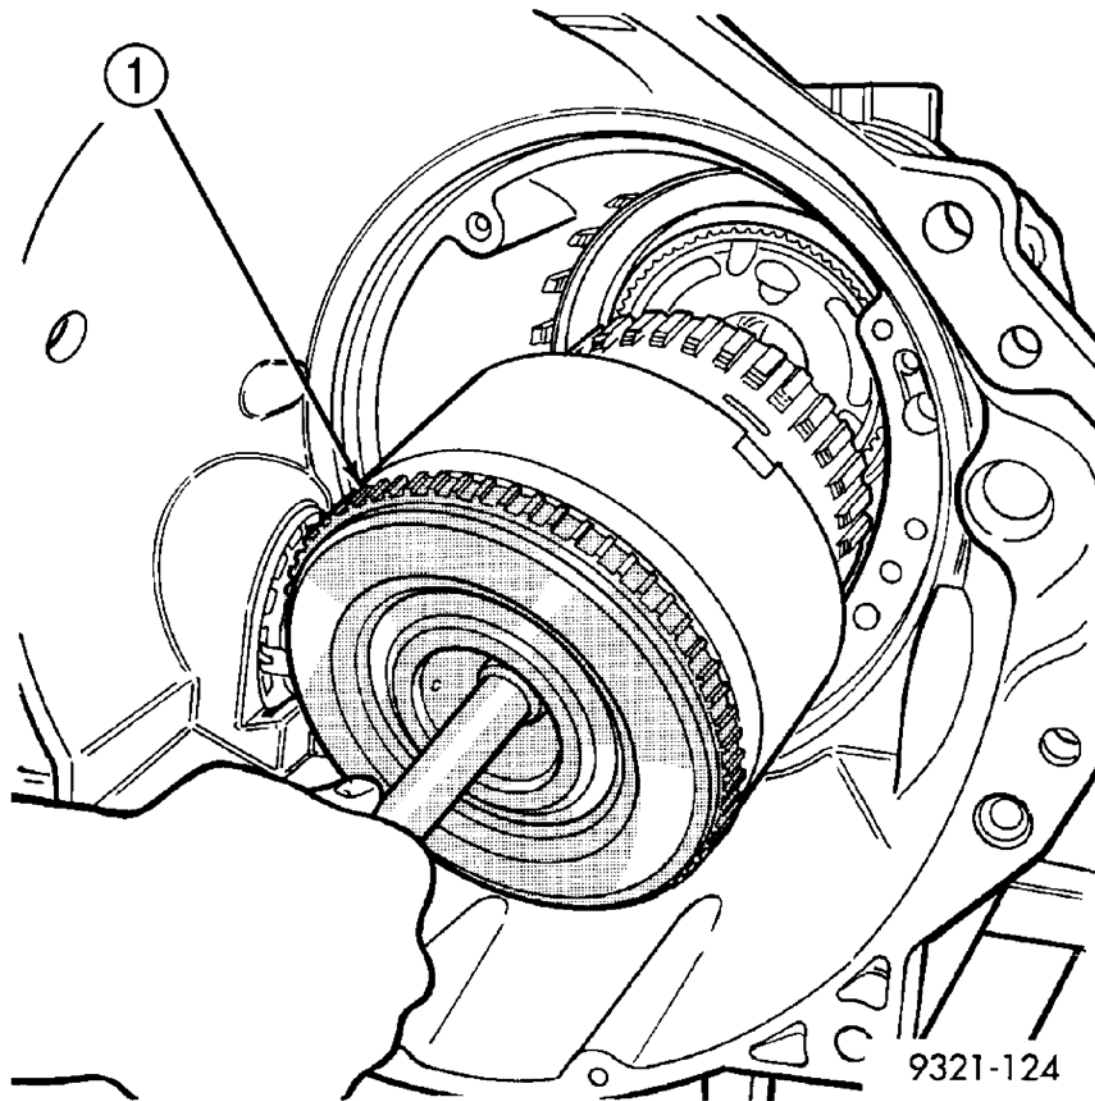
Installing Input Clutch Assembly With Proper Thrust Plate
